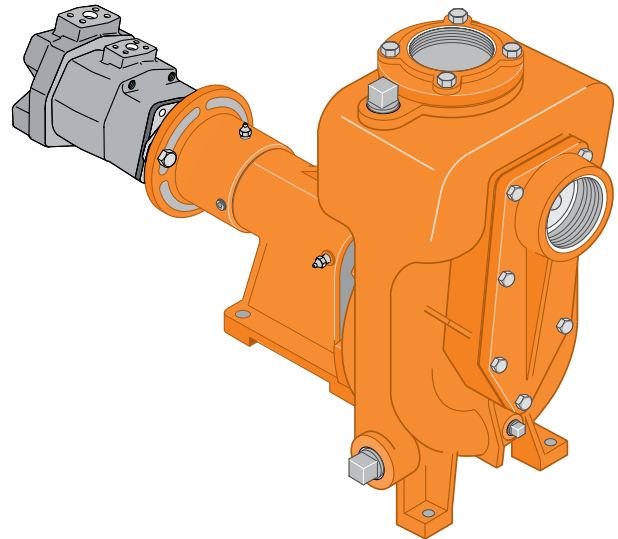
Hydraulic motor drive kit on Model B4ZRKS self-prime pump
